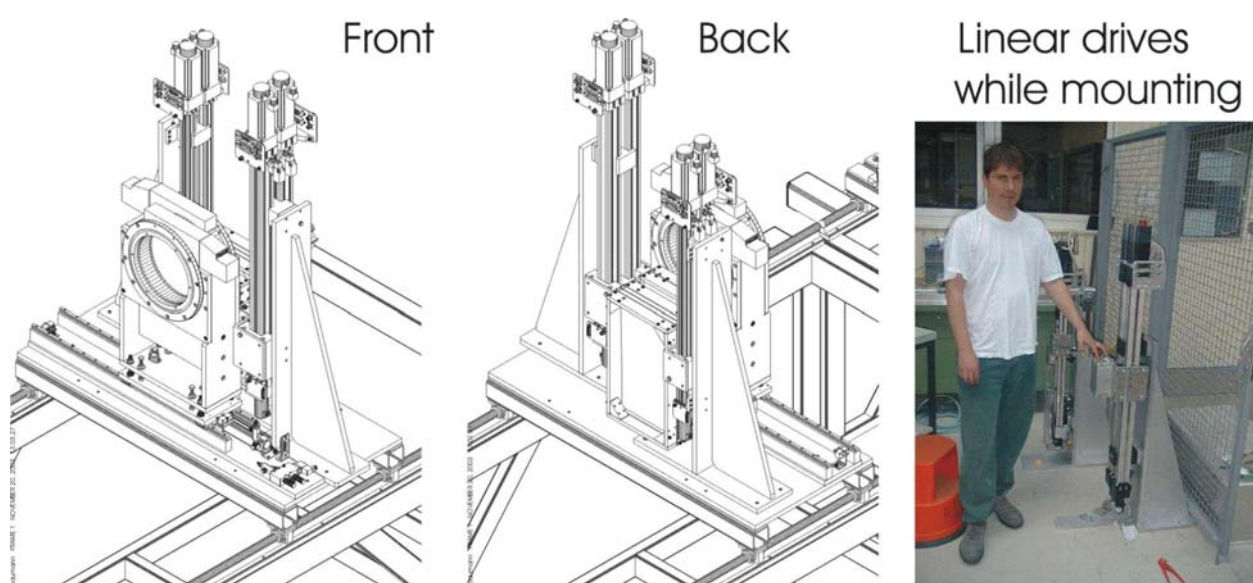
Drawings and first parts while mounting the prototype of the degrader for the energy buncher. This prototype will be used and tested for the FRS Ion Catcher setup.
